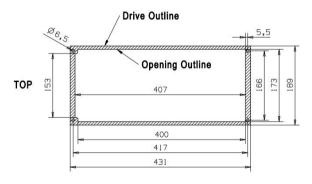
Flange mounting cutout dimensions for MI5 (Unit: mm)
